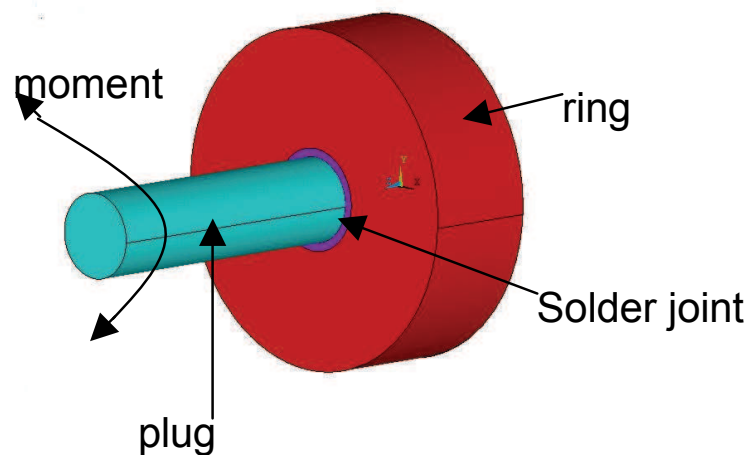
the ring an plug geometry. the plug has to solder in the middle of the ring. The difficulty in this operation is to center this plug to have a constant solder joint thickness
